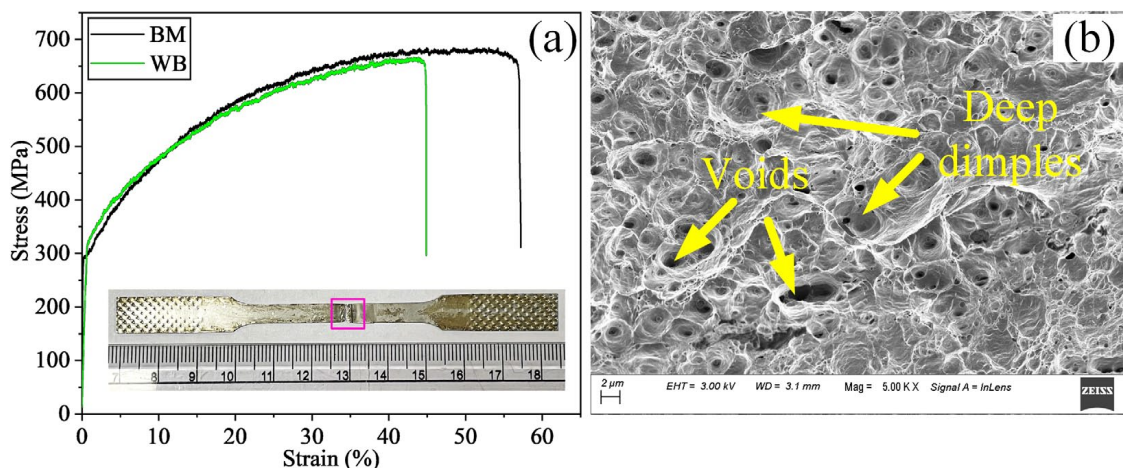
(a) Engineering stress-strain data for the BM and WB and (b) Fractography of tensile fracture specimen of the WB
